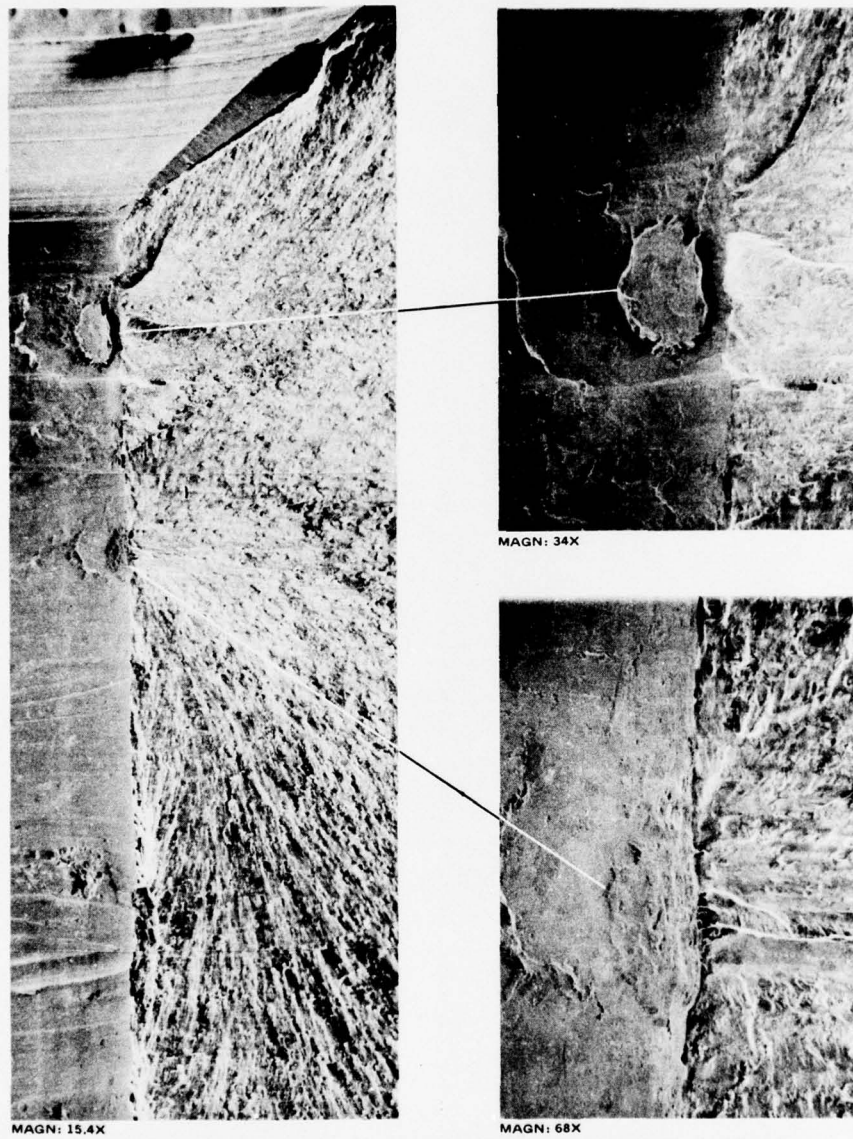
CRACK INITIATIONS FROM HOLE DEFECTS ON AFT SIDE OF HOLE SHOWN IN FIGURE 41.
